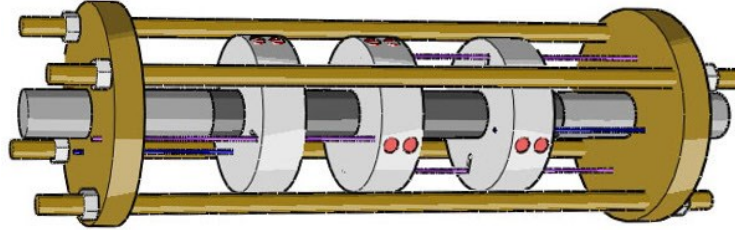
Assembly of the damping system, mounting parallel wires
